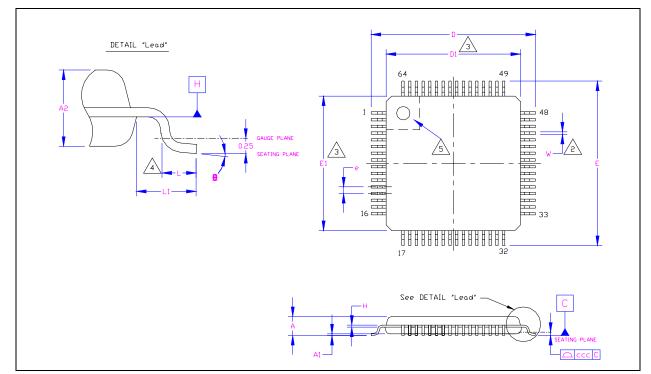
64 Pin STQFP Package Outline, 7X7X1.4 Body, 2 MM Footprint
